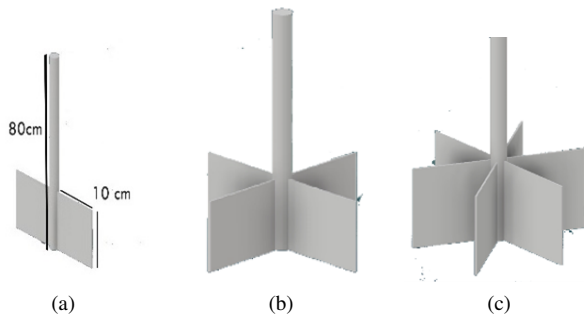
Turbine blades design of (a) 2 blades, (b) 4 blades, (c) 6 blades.
